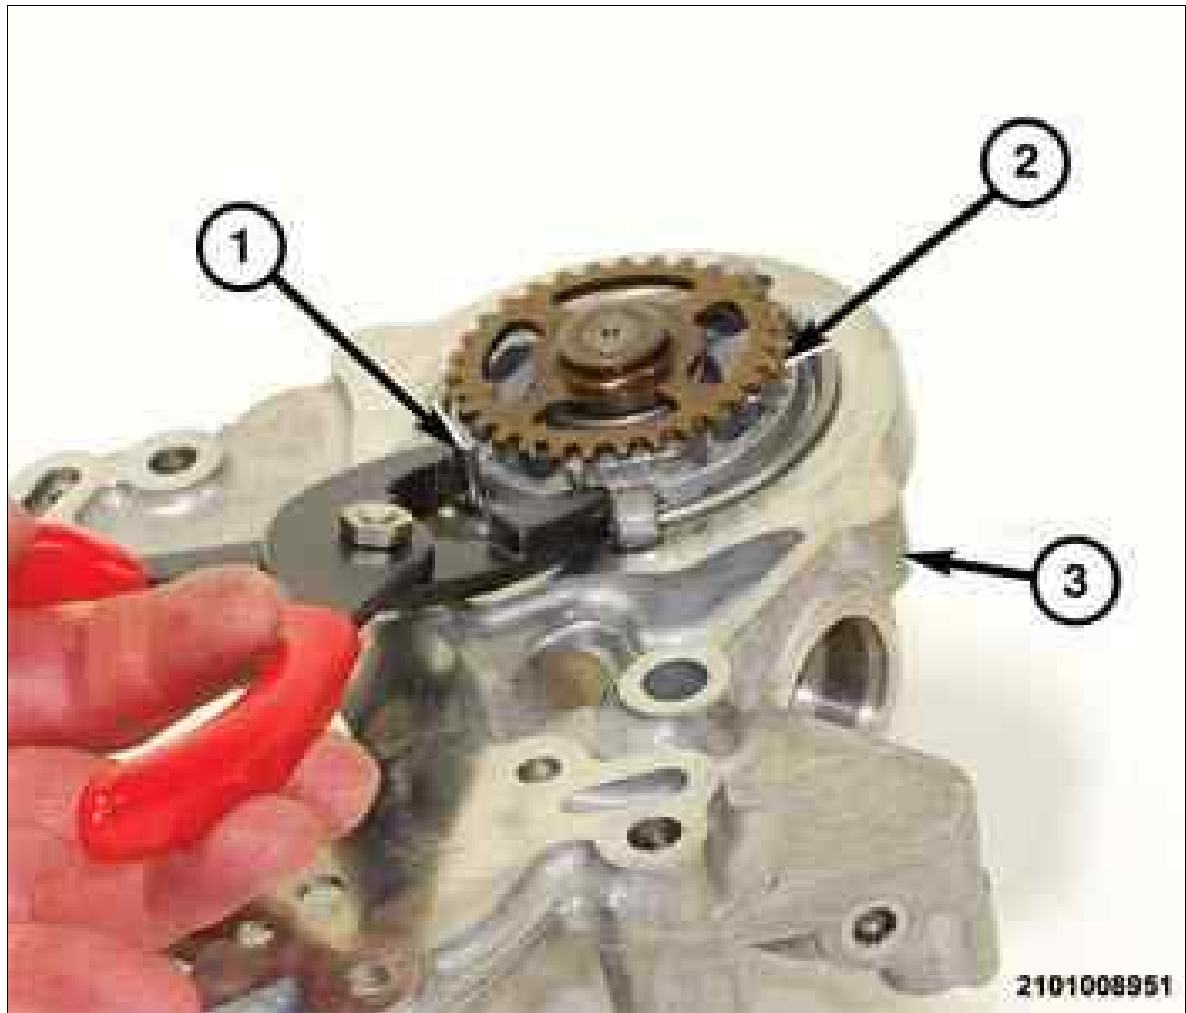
Oil Pump Drive Chain & Oil Pump Driven Sprocket
